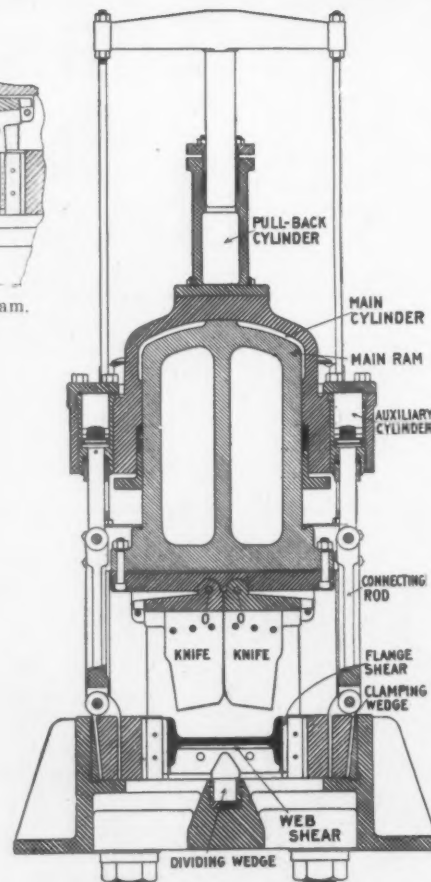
Sectional Elevation of the Watson-Stillman Hydraulic Beam Shear.
